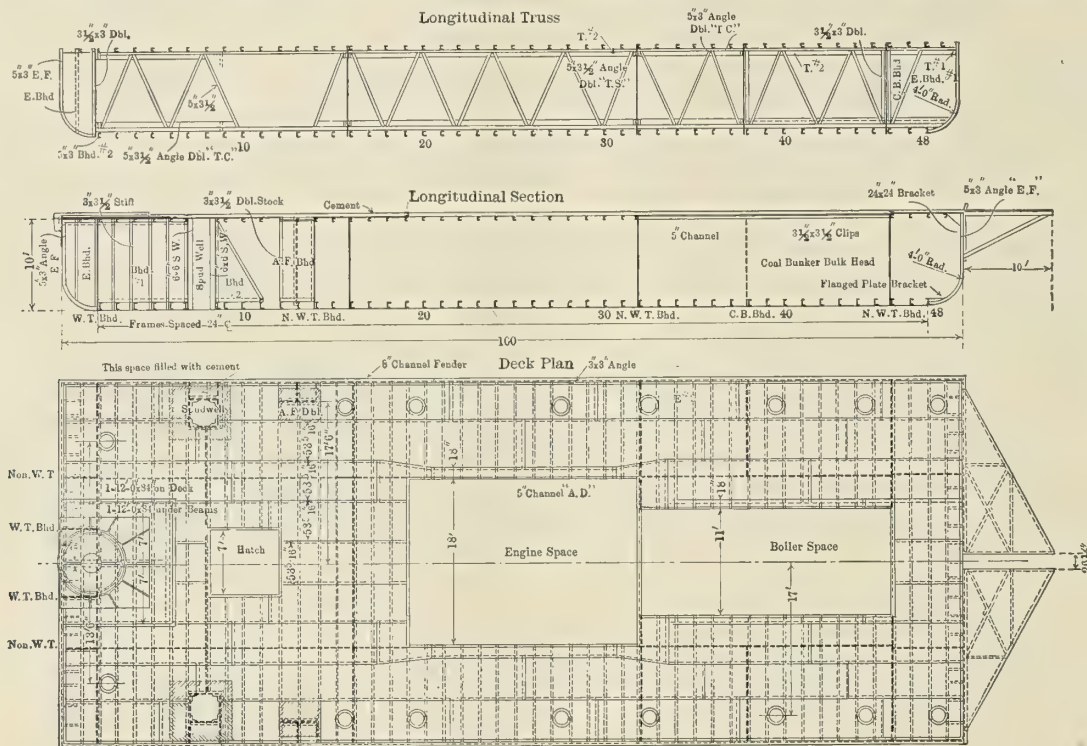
DETAILS OF THE CONSTRUCTION OF THE HULL.
